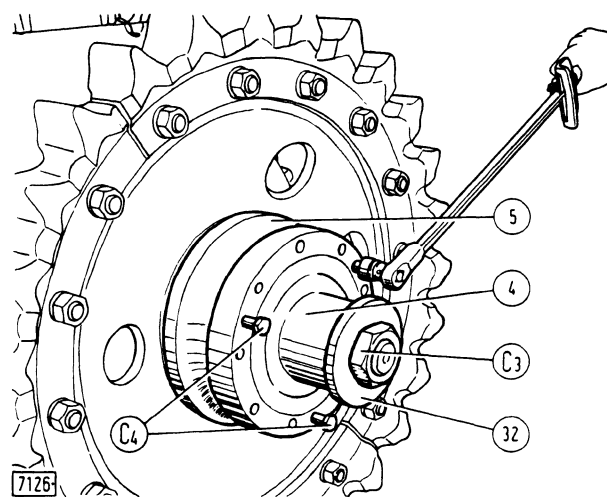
Tightening screws (C<sub>4</sub>) to determine the preload value of the sprocket taper roller bearings.
